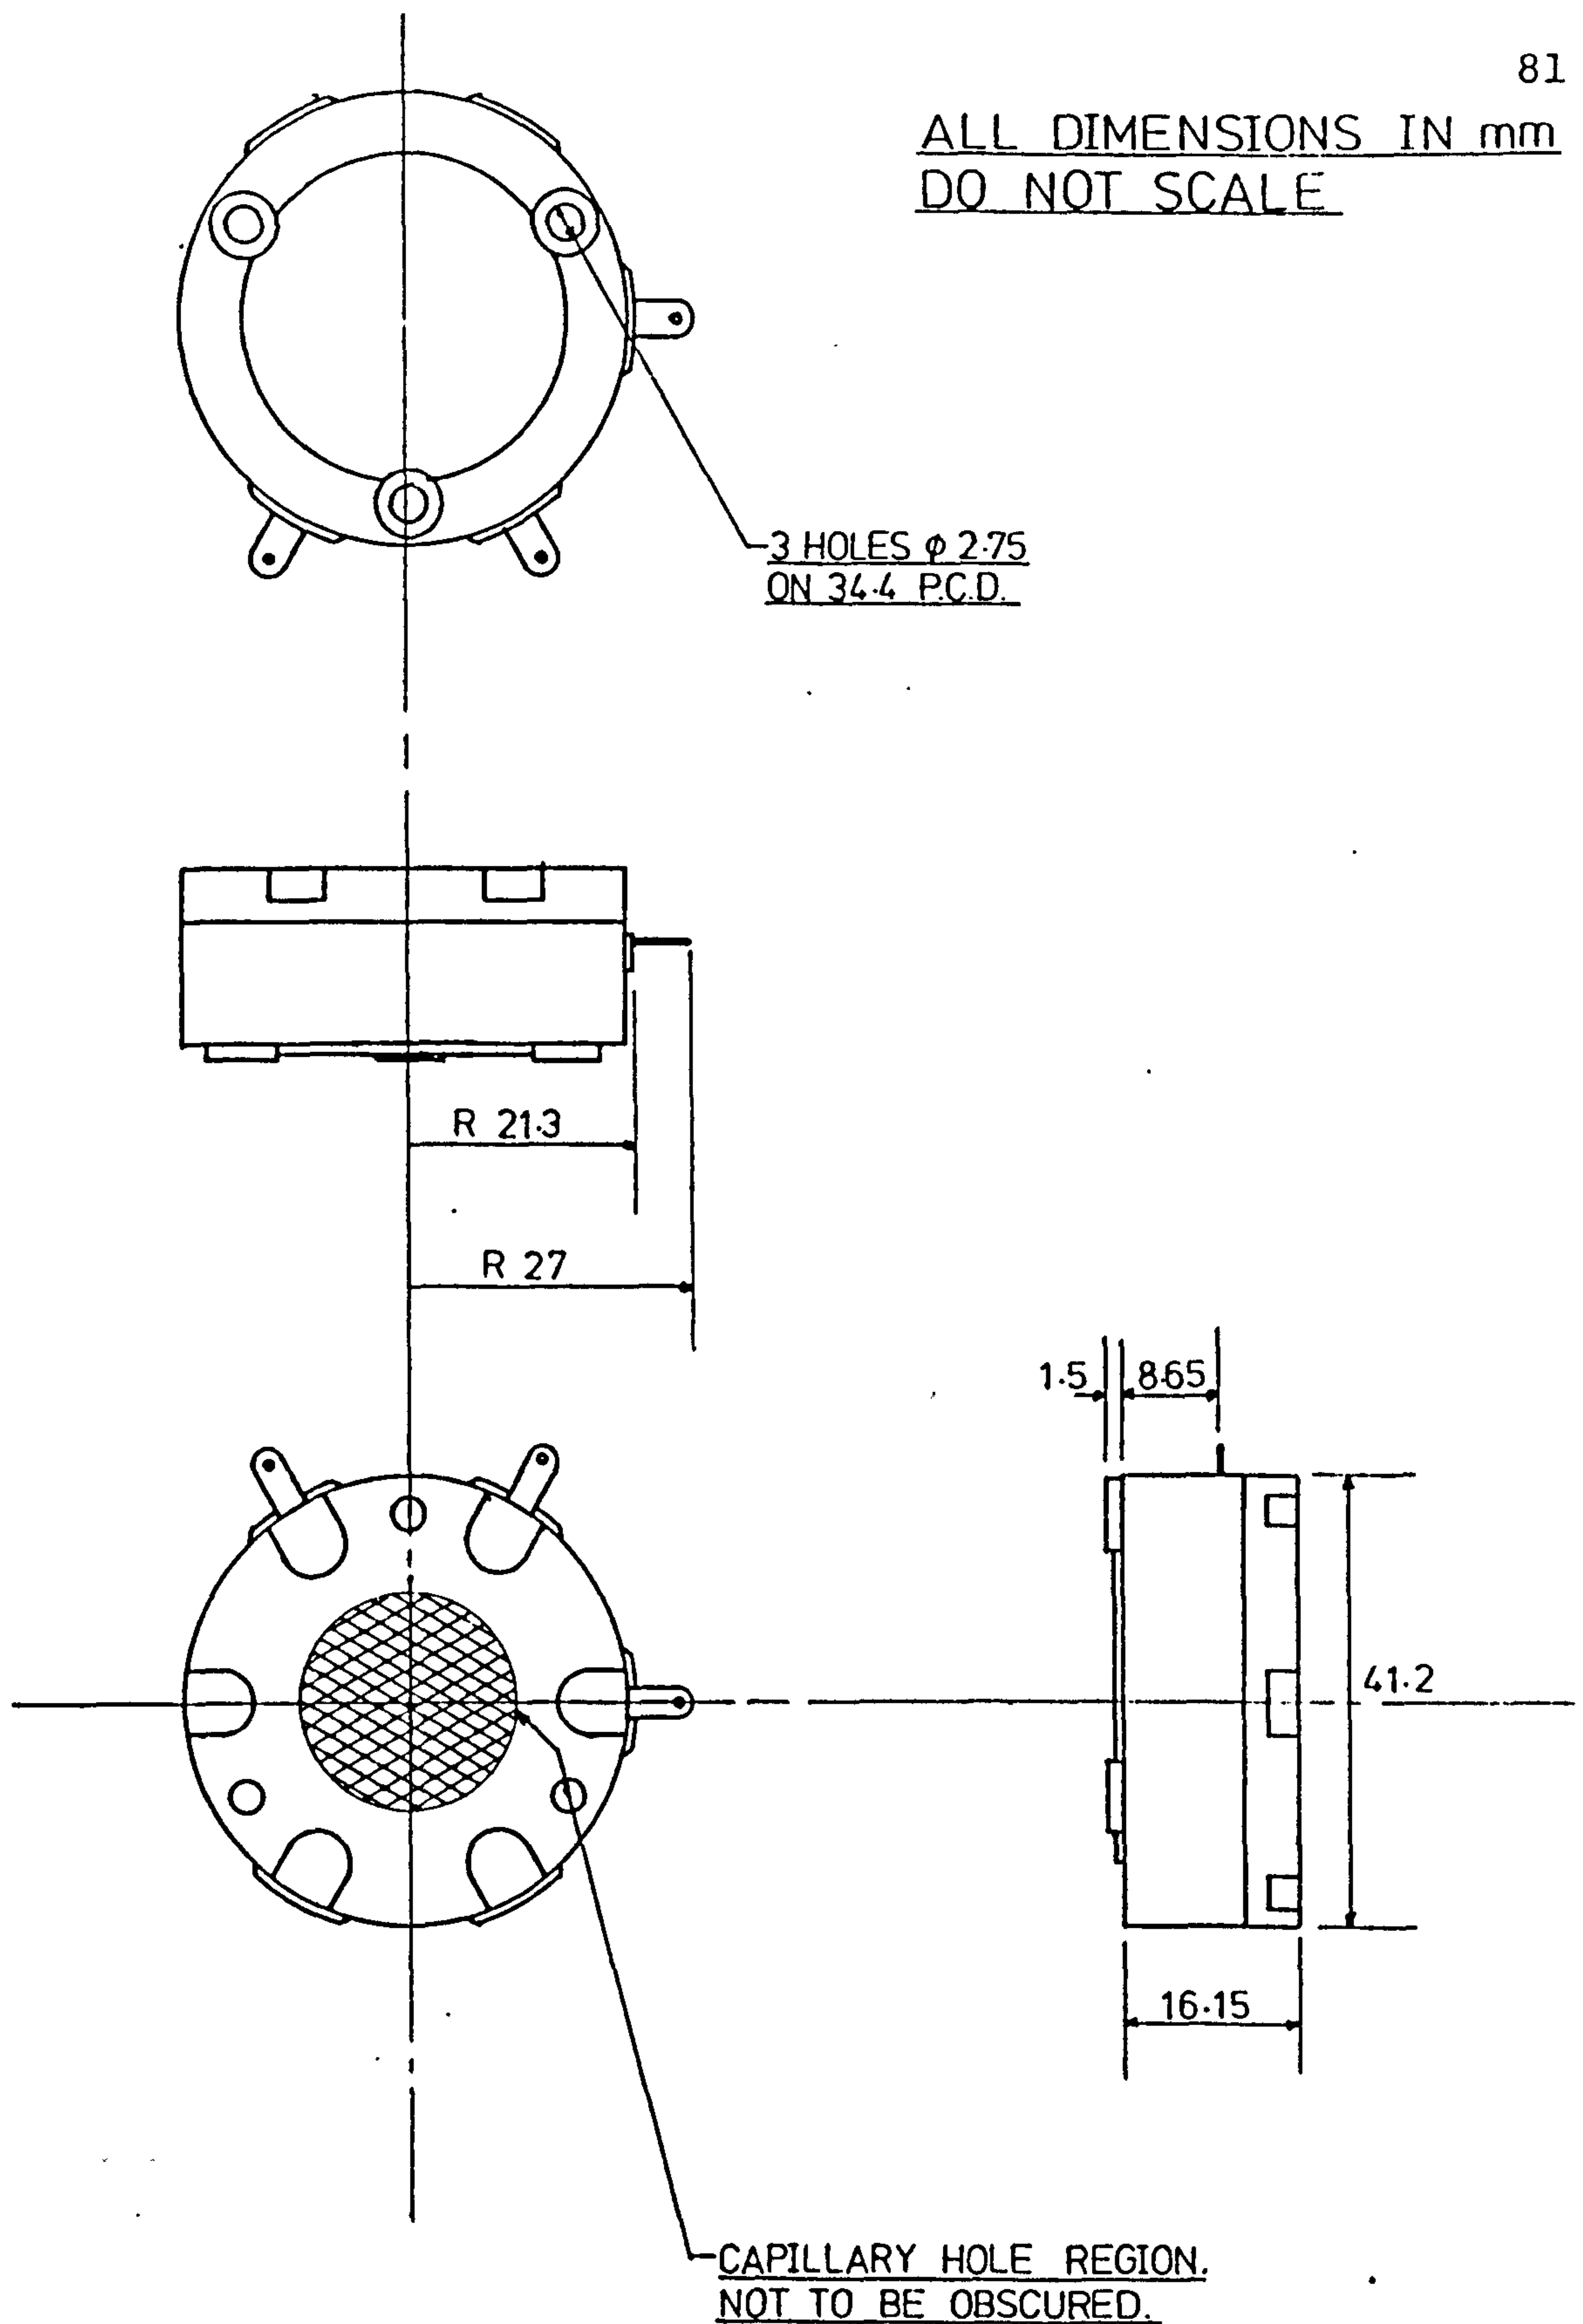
OUTLINE DRAWING OF MOULDED CO-SENSOR
